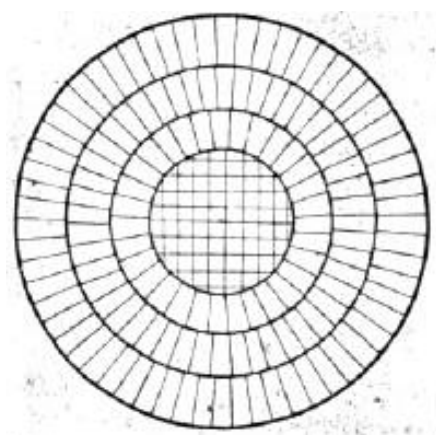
Horsfall Gun cross section Horsfall Gun under construction
